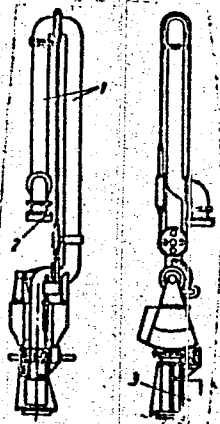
1 - swivel-connected pipes; 2 - attachment device; 3 - emergency disconnect unit.
